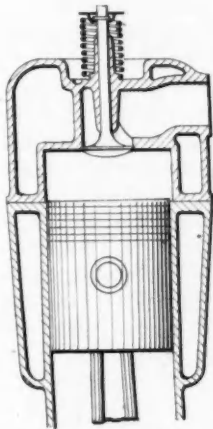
VALVE-IN-HEAD CYLINDER, HEAD-PARTING PLANE SLIGHTLY BELOW PISTON FACE
